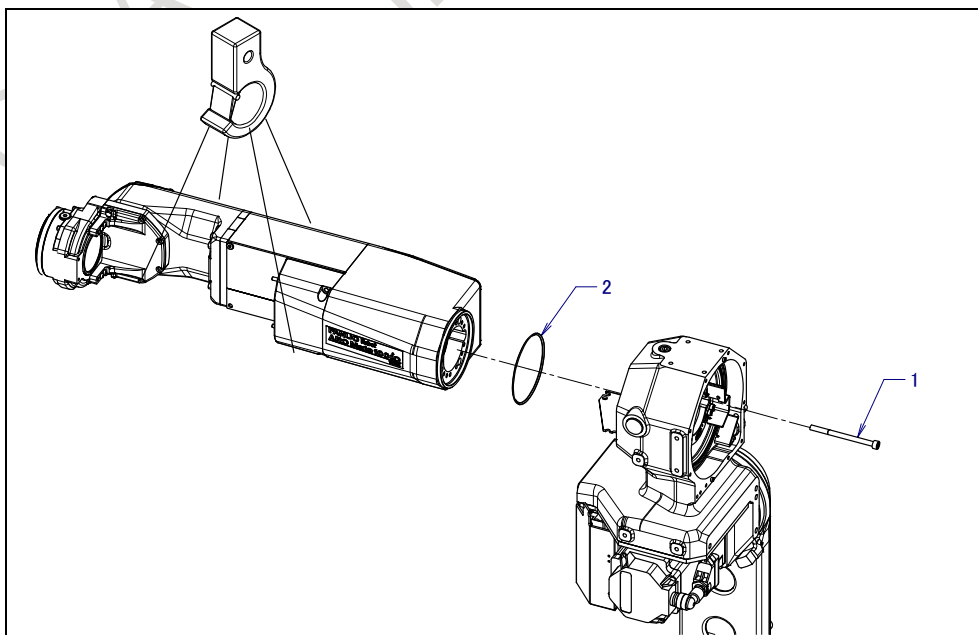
(a) Replacing the J4-axis gearbox unit (ARC Mate 100iC/10S, M-10iA/10S) (1/3)
